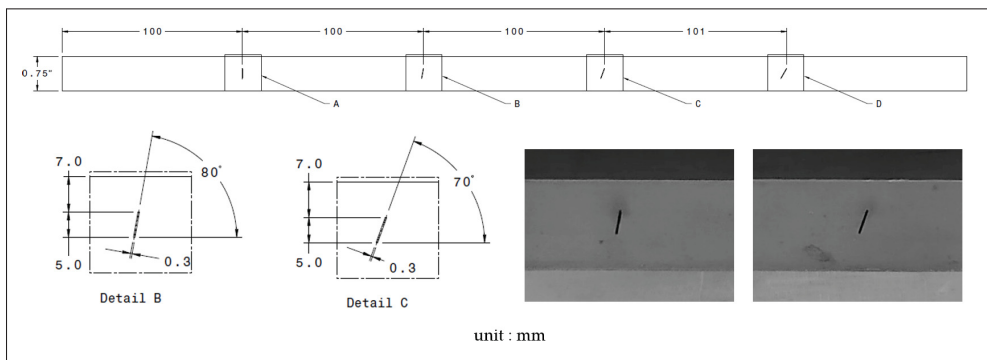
The $\frac{3}{4}$ " thick low-carbon steel sample plate. Four angled notches of 0.3 mm width were grooved using electrical discharge machining (EDM). Details (left) and pictures (right) are for a 70° (notch C) and 80° (notch B)
